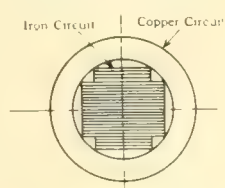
SECTION THROUGH ONE SIDE OF A CORE TYPE TRANSFORMER
